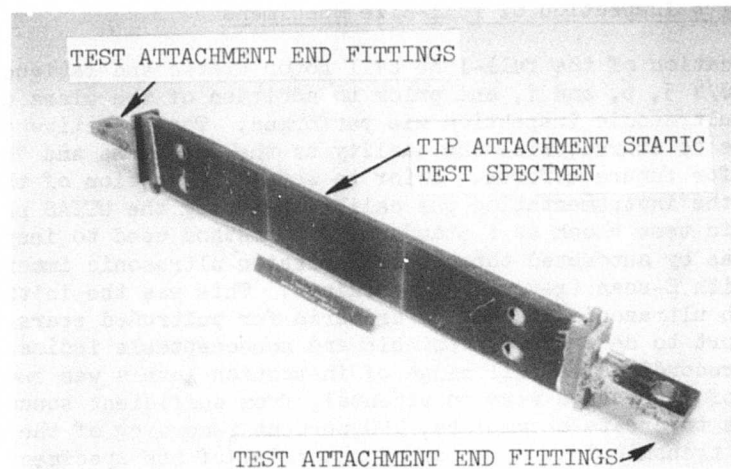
Tip Attachment Specimen With Test Attachment End Fittings Installed.
